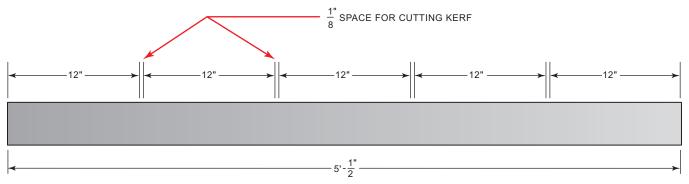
Because of the kerf, an additional 1/2 in. (13 mm) of stock would be required to make these five 1-ft pieces.
